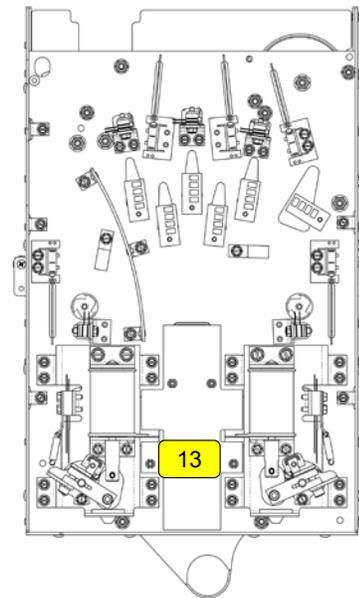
Major playfield assemblies, Bottom locations.
